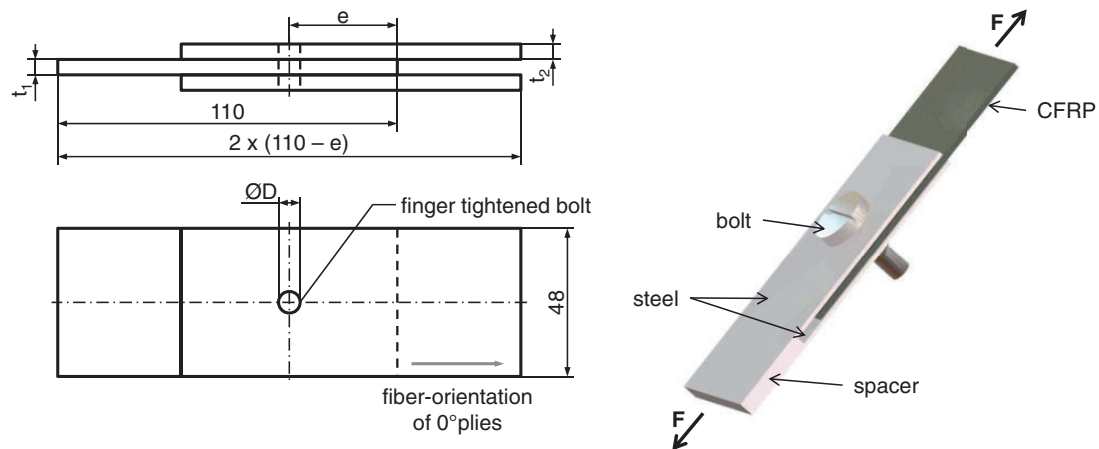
Specimen geometry joined by finger-tightened bolt for double-lap shear test.
